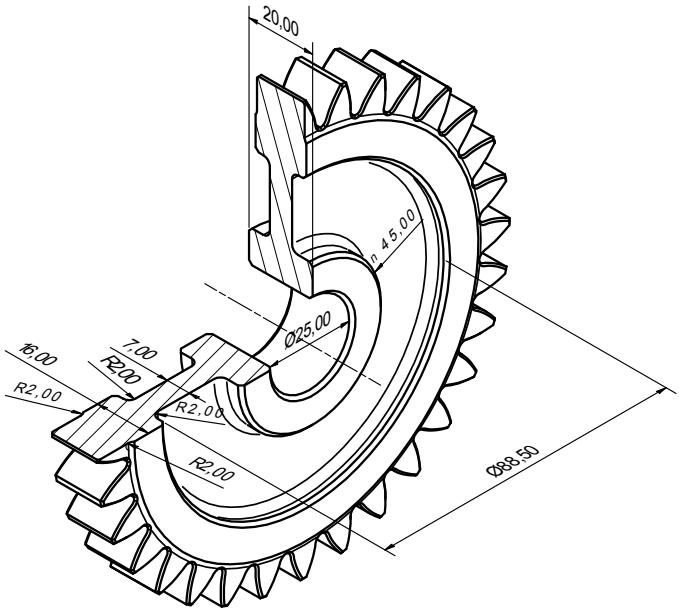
Isometric section of the specimen with some dimensions highlighted.
